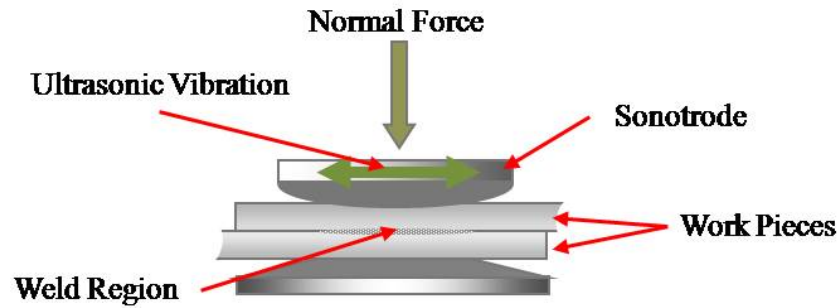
Schematic representation of ultrasonic metal welding, a solid-state joining process which forms the basis for UAM.
